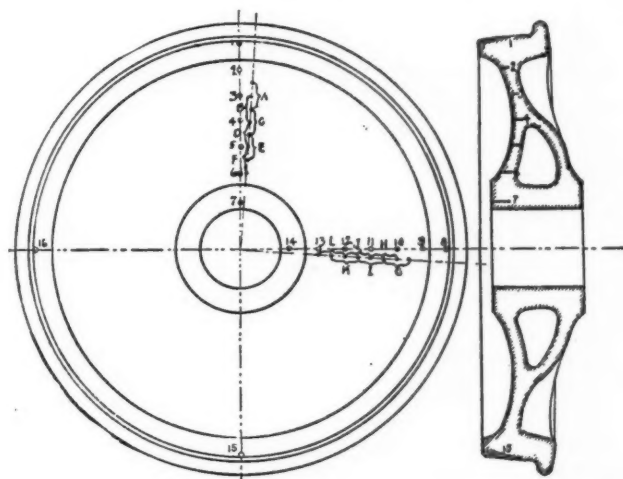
Sketch Showing Location of Thermocouple and Strain-Gage Holes
